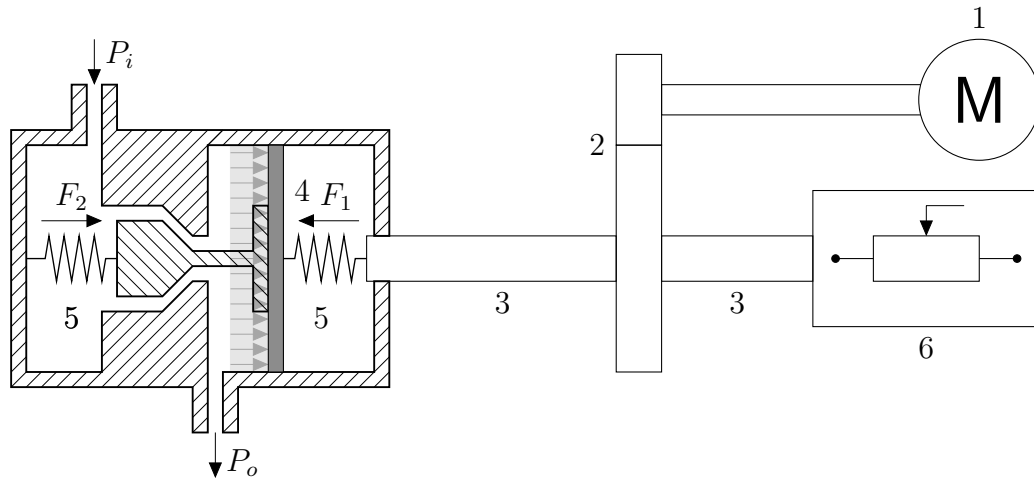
Air supply valve layout. 1 – D.c. electric motor. 2 – Gear box. 3 – Shaft. 4 – Diaphragm. 5 – Springs. 6 – Potentiometer.
